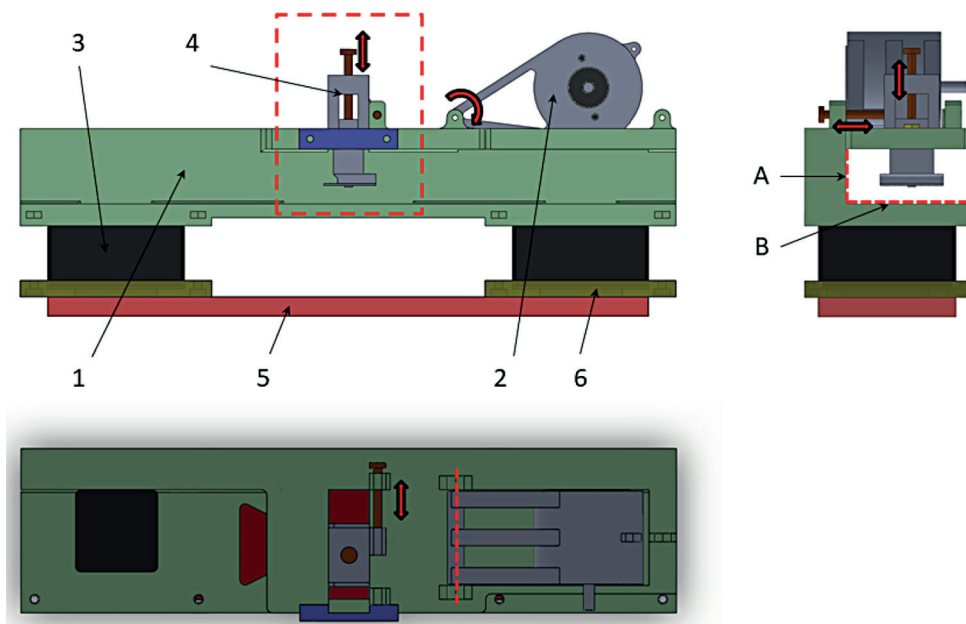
3d CAD model of the measuring head (orthographic projection)
